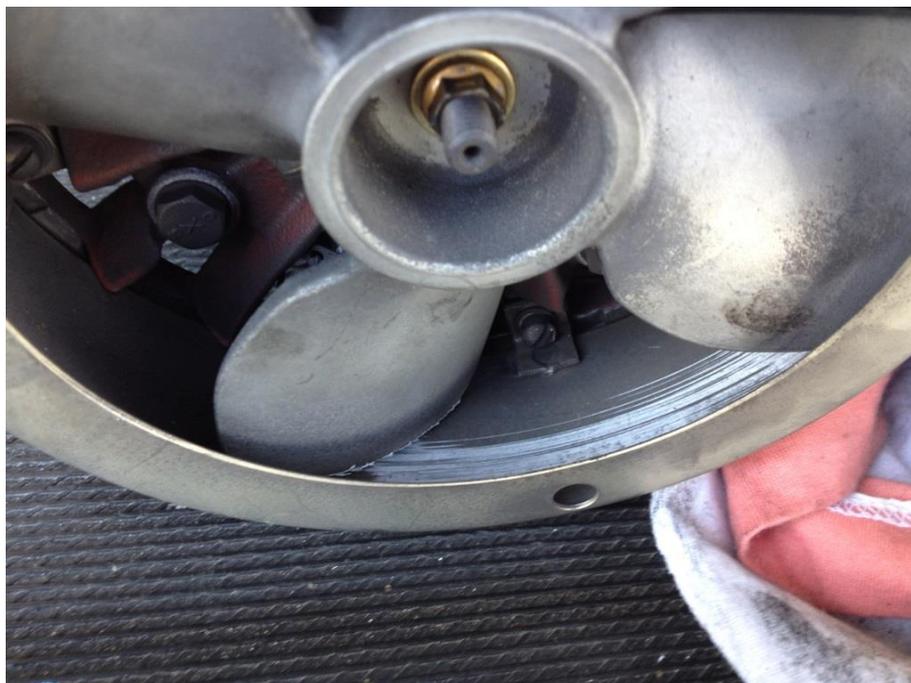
Starter/Generator fan damage due to bearing failure
